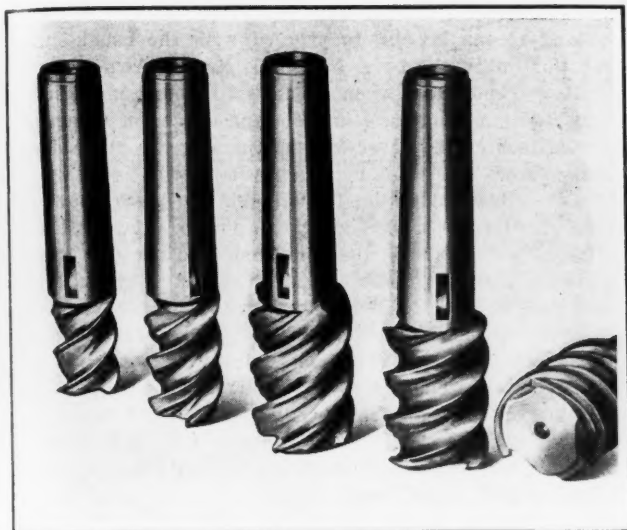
Cutters used to mill Grooves in Cams shown in Fig. 2
